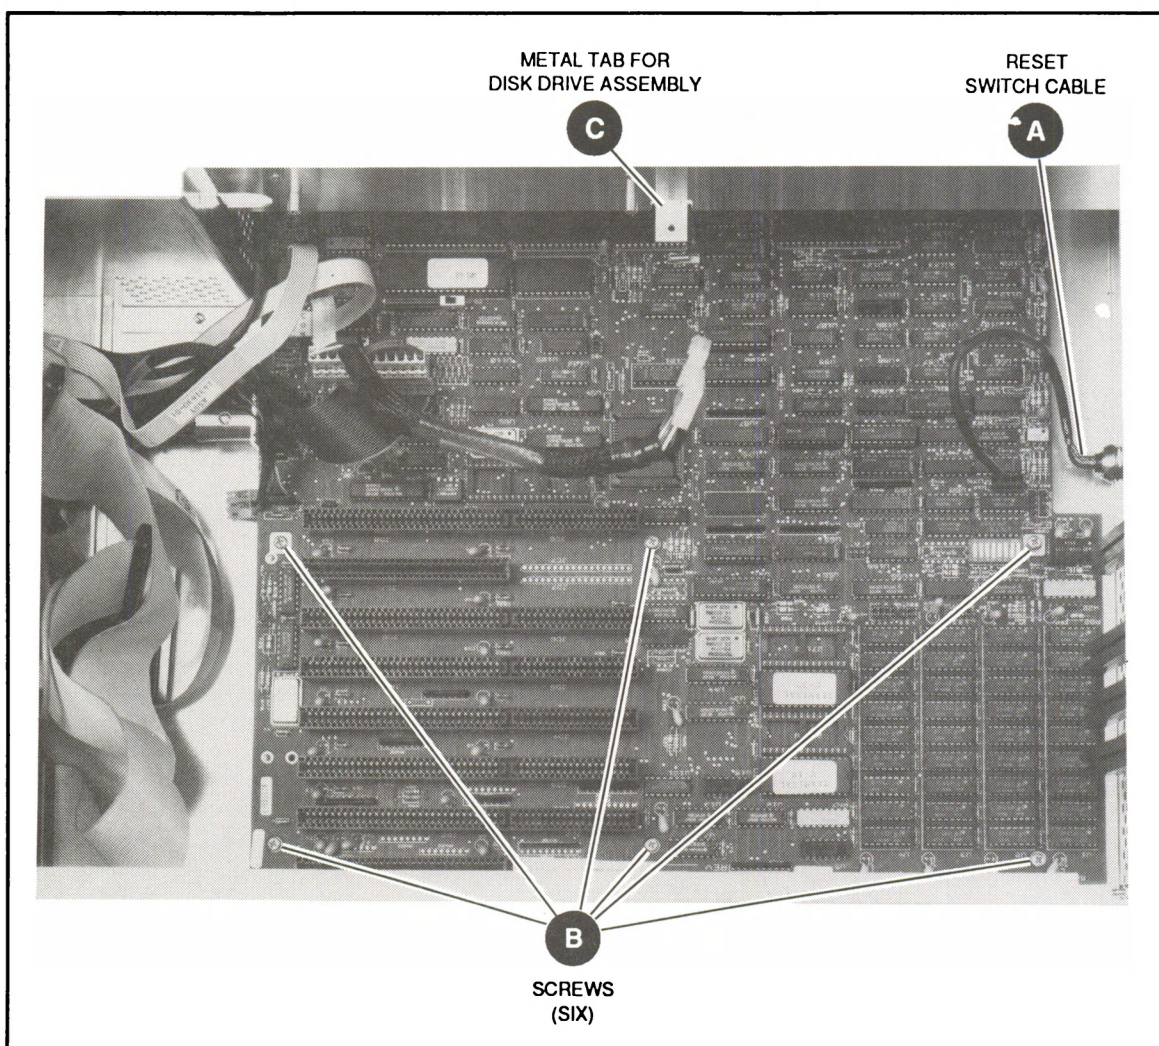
CPU Motherboard PWA in Edit Controller Chassis
